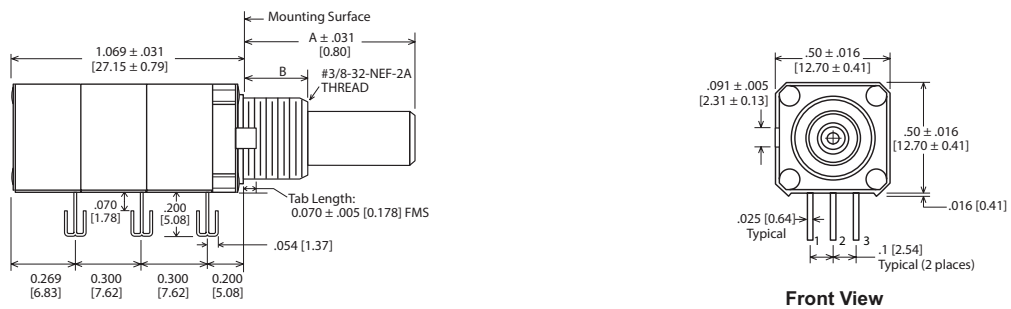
SHA: Single Potentiometer or RS, Solder Hooks, 3/8" Dia. Bushing
